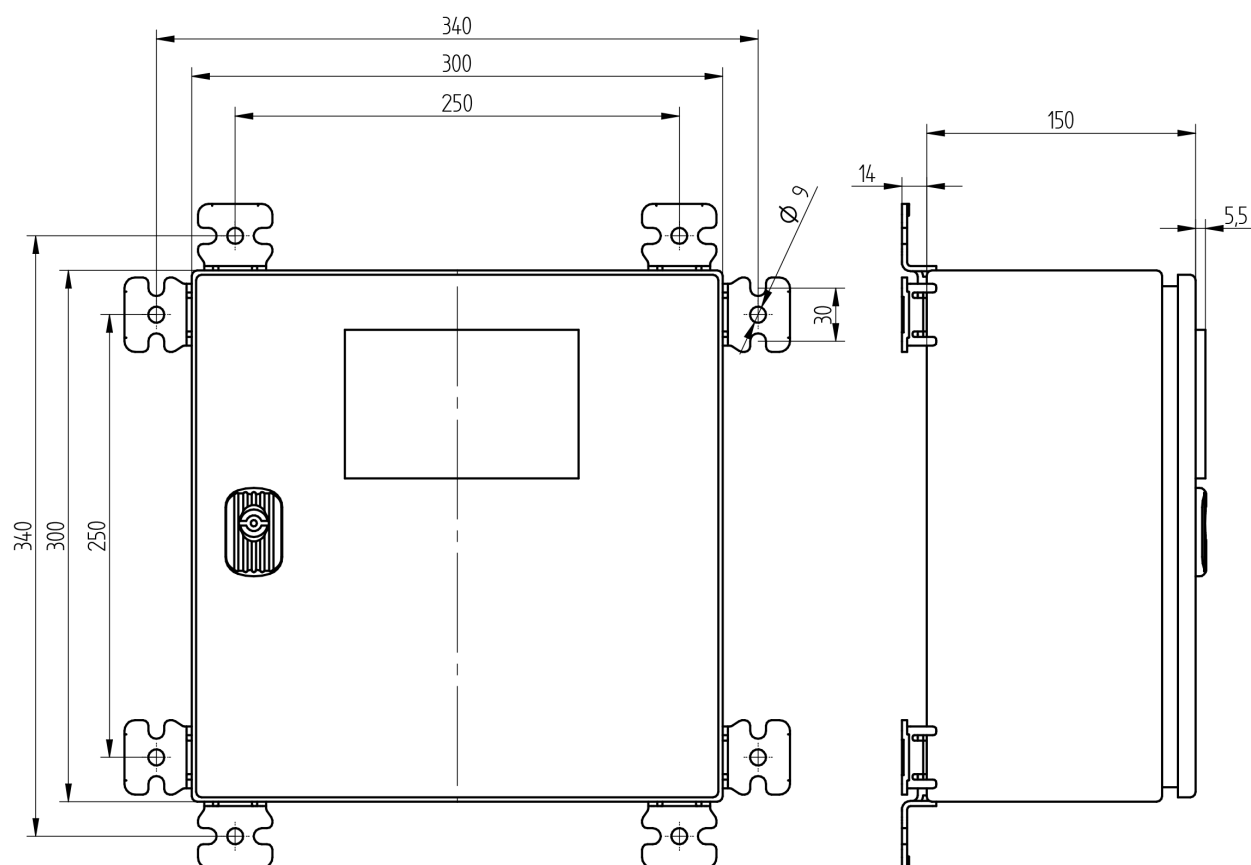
Dimensional drawing LT3 in stainless steel housing with wall mounting vertical/horizontal and UI300-LT-V2 with additional cover for IP65 (dimensions in mm)
